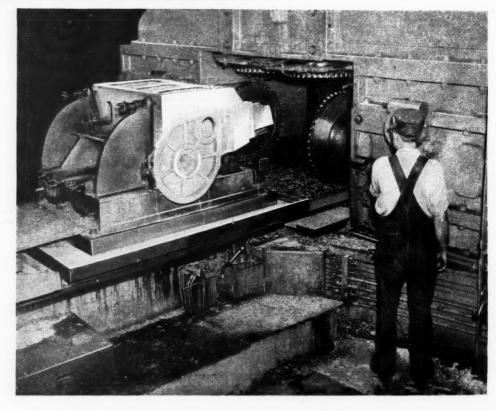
(Left) Welded steering-clutch case assemblies are cleaned and stress-relieved by tumbling. Star-shaped, hardened steel shot is used in the tumbling operation
